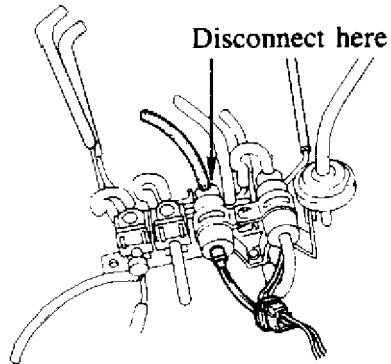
Disconnecting Vent Solenoid Valve Vacuum Hose
